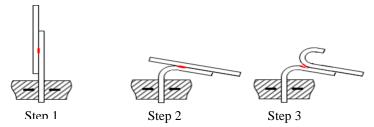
Step 1: Grip in vise. Step 2: Bend specimen. Step 3: Peel pieces apart with pincers [13].
